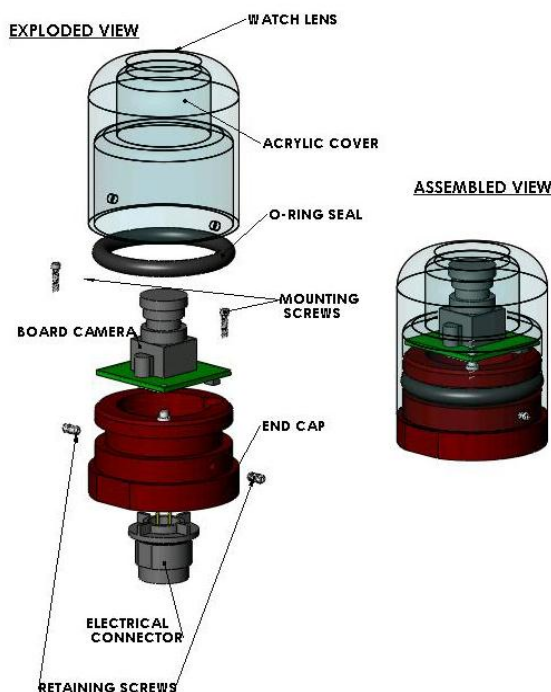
SOLIDWORKS EXPLODED VIEW OF CAMERA
